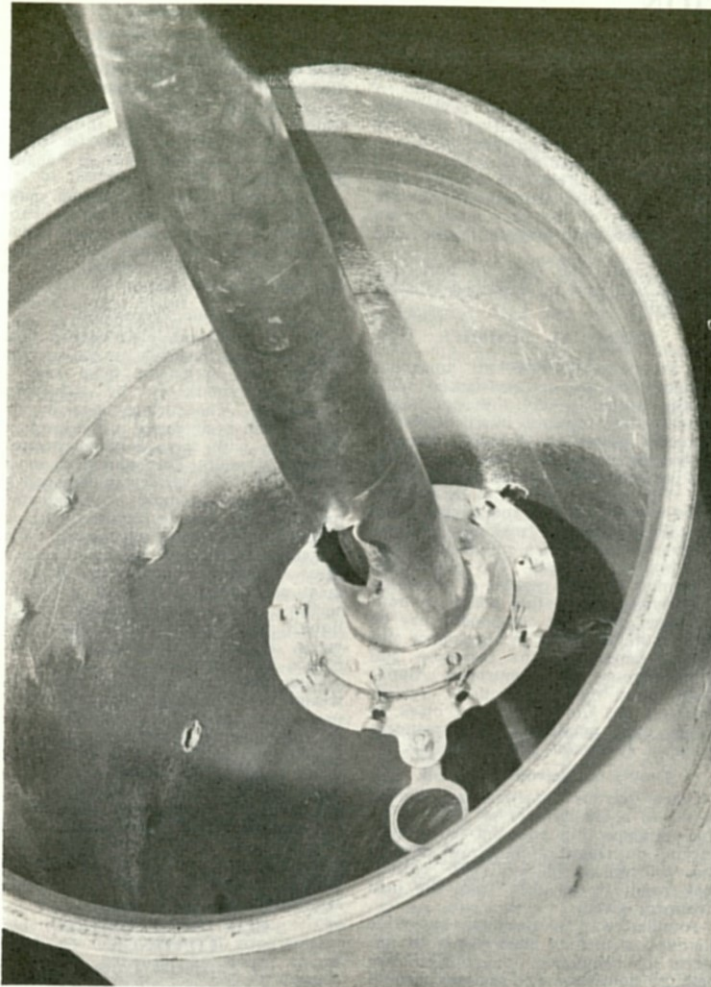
Inside Surface of a 900 Pair Cover, showing Star Shaped Cracks from Bullet Penetration.
